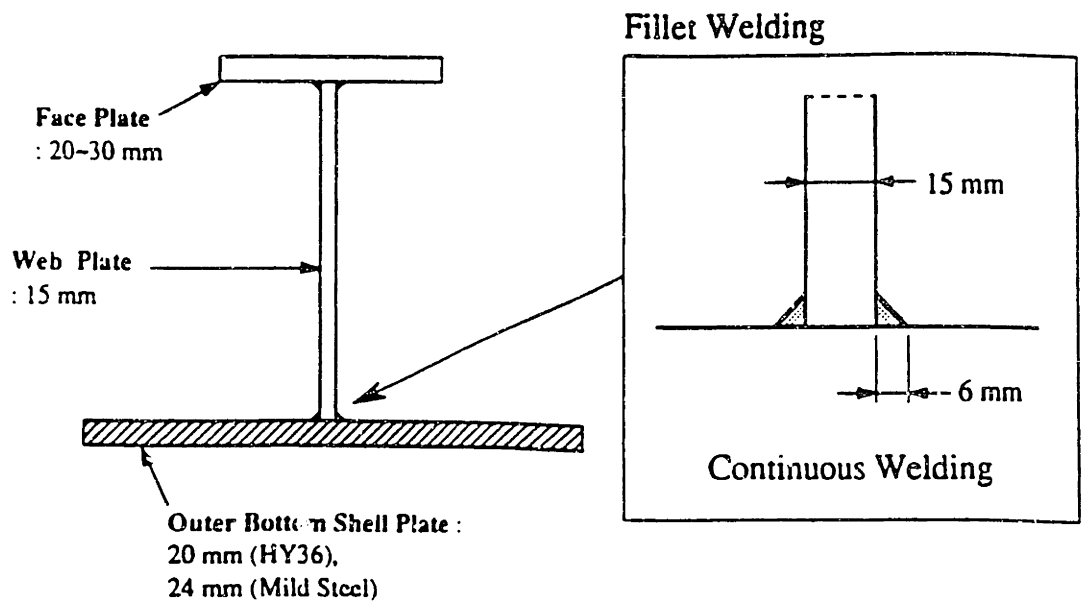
Details of Welding Designs for Single Hull Structures,
